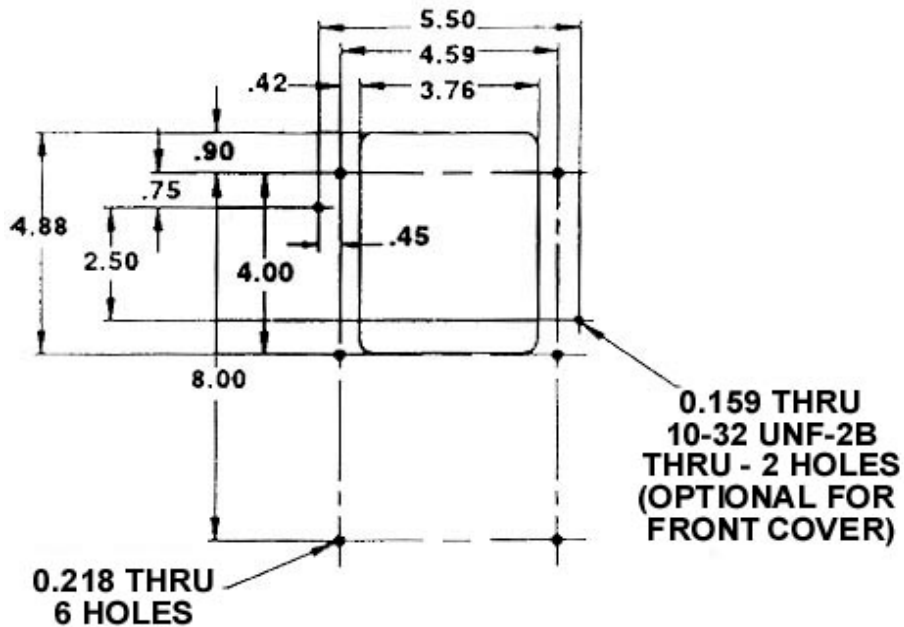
REGULATOR MOUNTING DIMENSIONS
